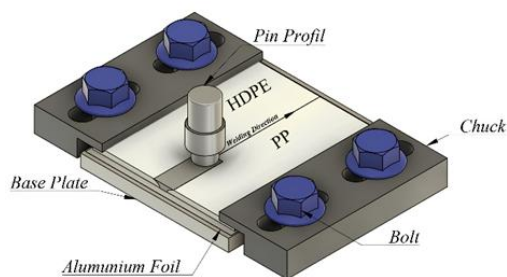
Illustration of Friction Stir Welding of HDPE-PP
